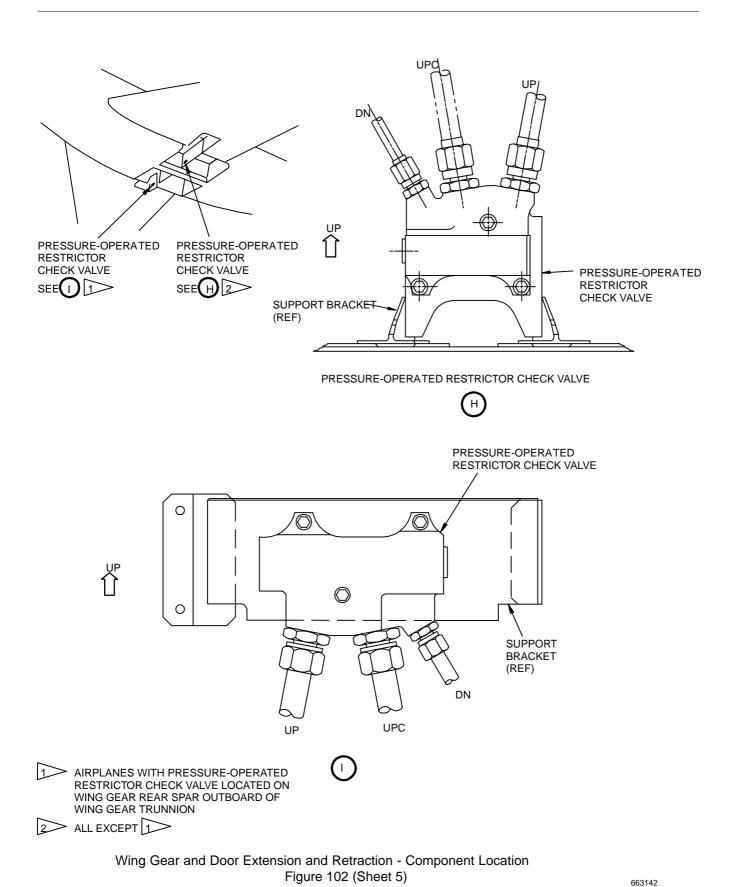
32-32 Wing Gear and Door Ext./Ret. Comp. Location Fig. 102 (Sheet 5)
